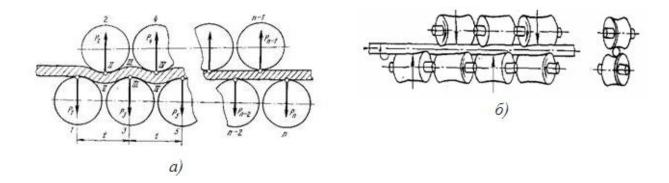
Schematic of the rolled-up rotation with a replaceable bend on roller machines: a - with a longitudinal feed without rotation; B - with a screw feed
